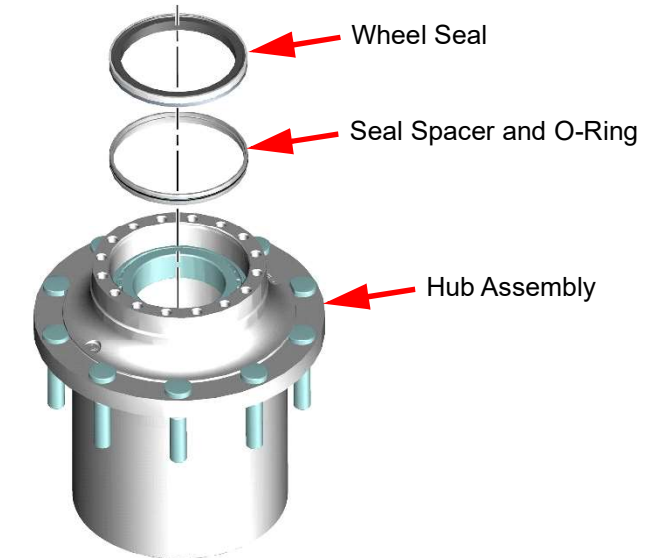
Removing Wheel Seal, Seal Spacer, and O-Ring from Hub Assembly
